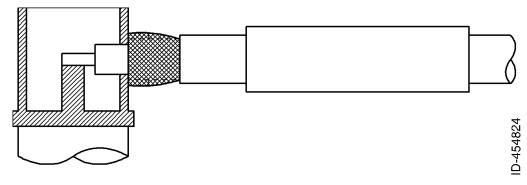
Coax Cable Outer Shield to BNC Solder Location
